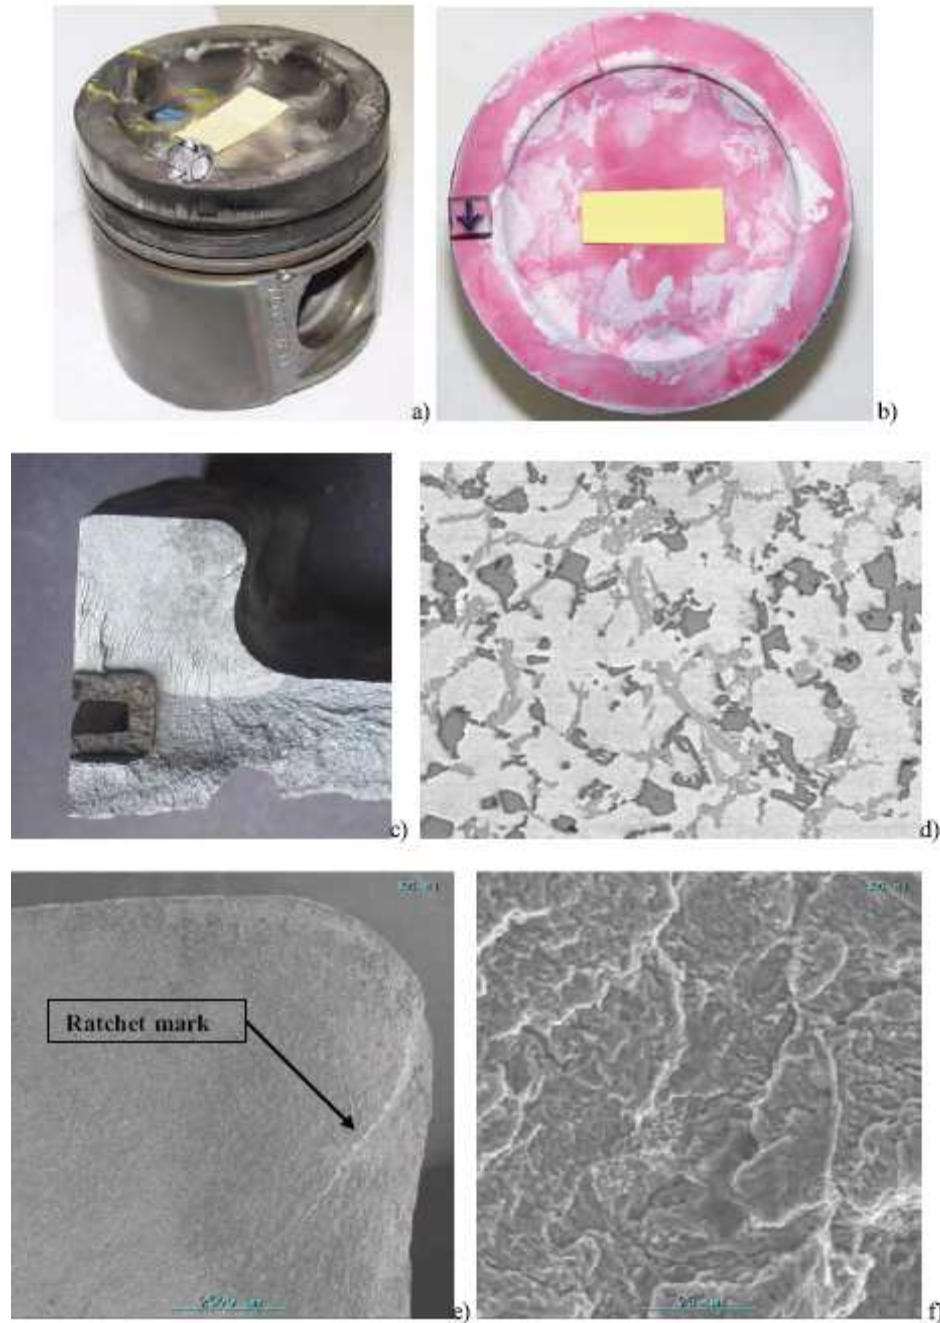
General aspect of an automotive diesel engine piston cast using 339 alloy with 13%Si (a), which presents a fatigue crack (b) in the head region; c) aspect of the fatigue fracture surface presenting beach marks; d) microstructure of the 339 alloy constituted mainly by primary Si particles, α + Si main eutectic, without α dendrites; e) SEM low magnification image of the fatigue fracture surface, without evidence of smooth region. There is a ratchet mark in the crack propagation direction; f) high magnification SEM observation: fatigue striations are barely seen.
